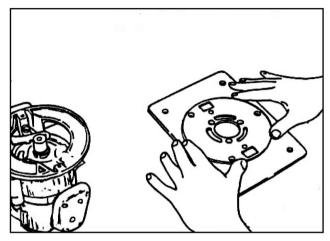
Remove the base plate from the router (Make sure power is disconnected prior to installing router or removing base plate) and align the table plate hole to the router base plate hole.
